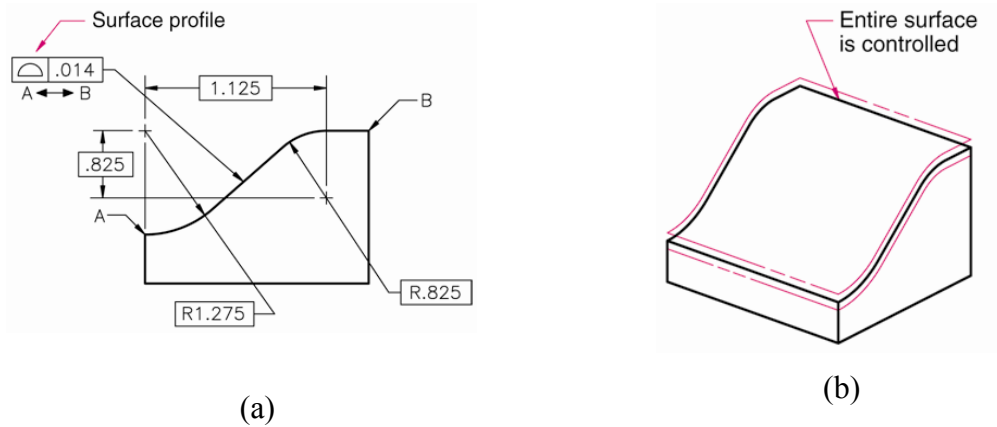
(a) and (b): Surface profile tolerances simultaneously control all points on the surface to which the tolerance is applied.
